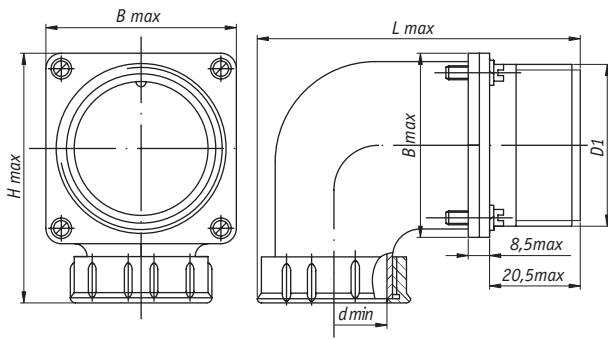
Fixed connector plugs and sockets (modular BUEA) with elbow pipe and nut for shielded cable
